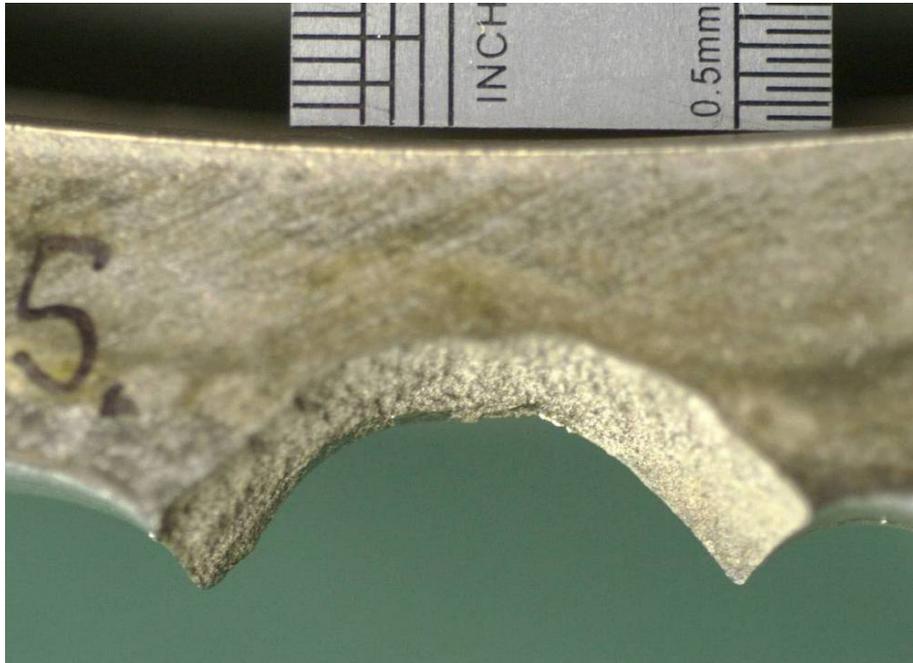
&b View of opposing fracture surfaces in lug 5.
